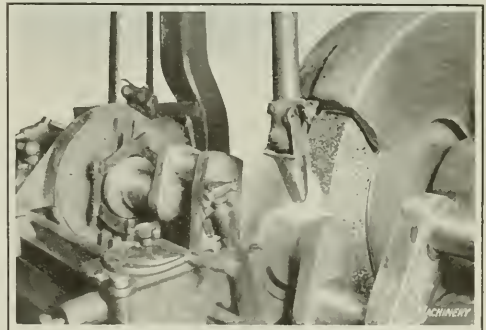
Grinding Main Bearings of Crankshaft on Plain Cylindrical Machine
